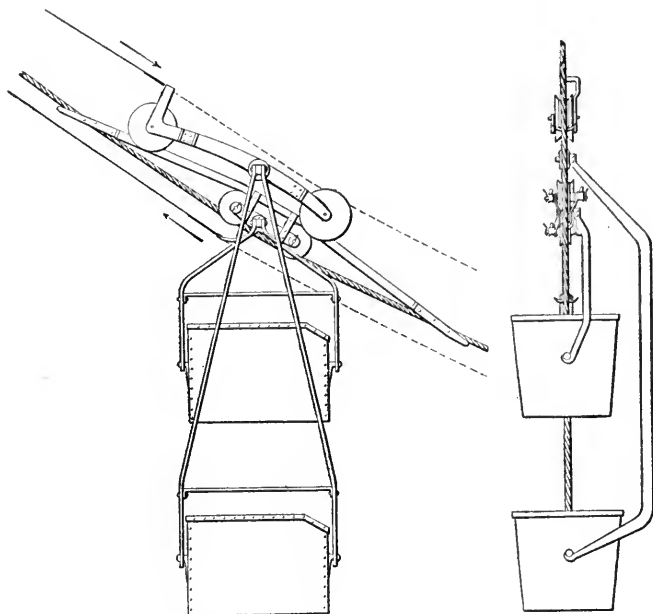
DEVICE PERMITTING TWO BUCKETS TO PASS ON SINGLE ROPE.
